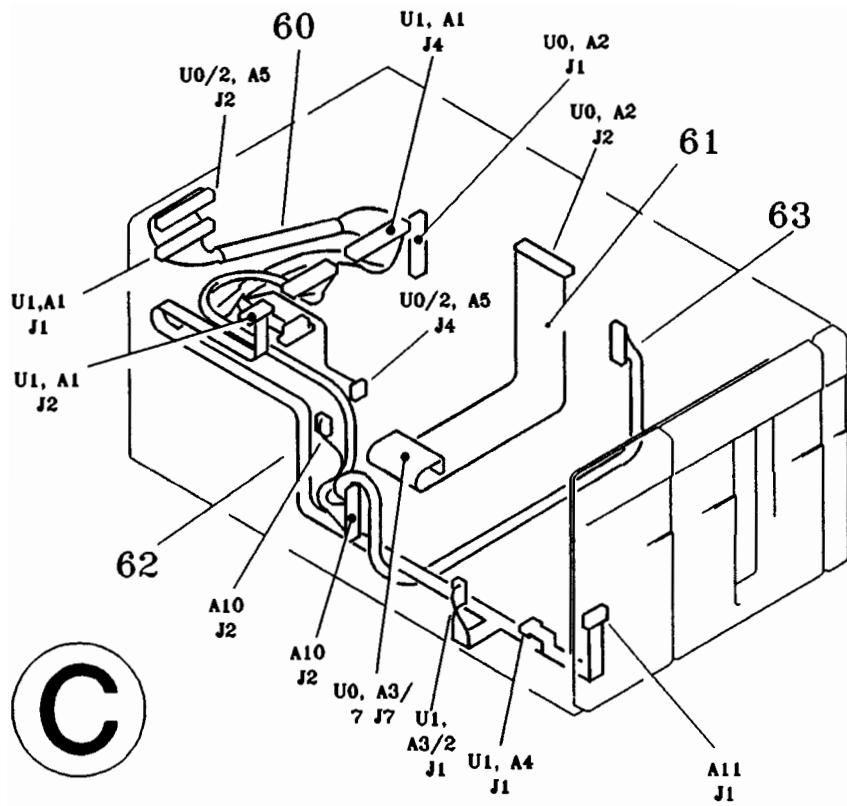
HP 35401A Cabling Layout (sheet 3 of 3)
